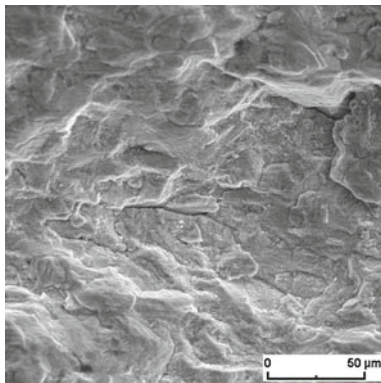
Fracture surface of a stress corrosion crack in a CuZn37 alloy
